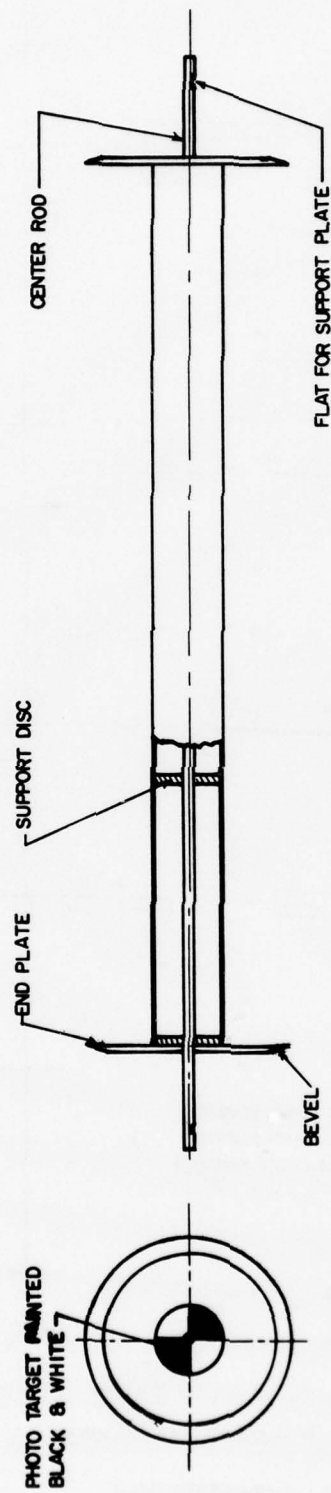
CYLINDER DRAG ASSEMBLY - LOCATION 1
